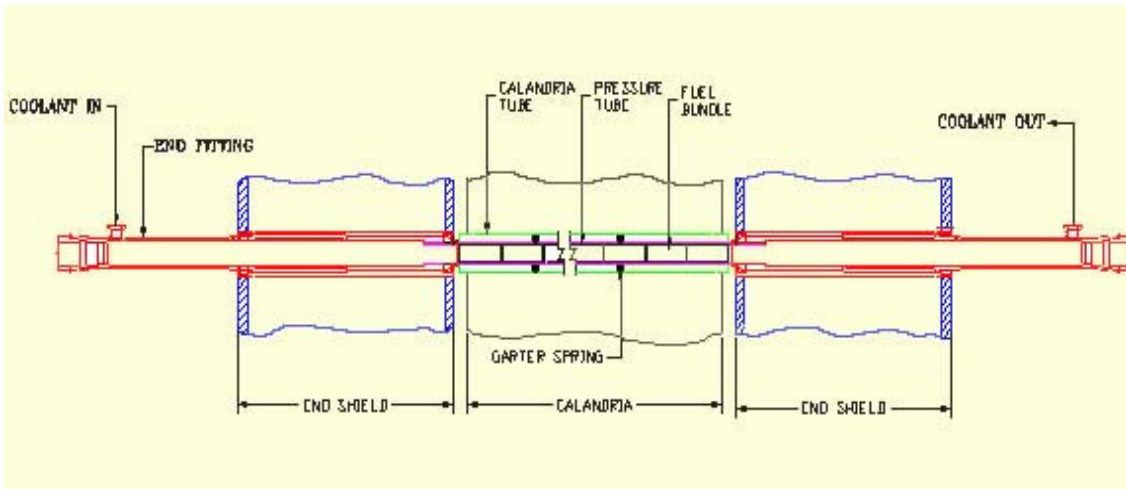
Schematic of PHWR Coolant Channel Assembly
